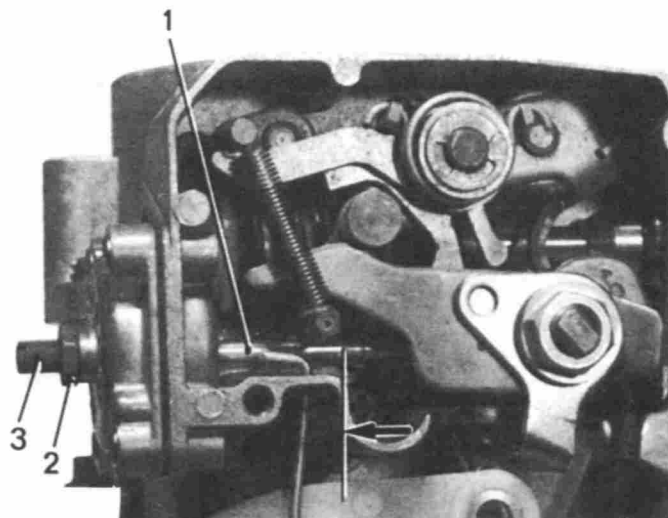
Adjustment aperture for dimension 'a' (Sec 4)
